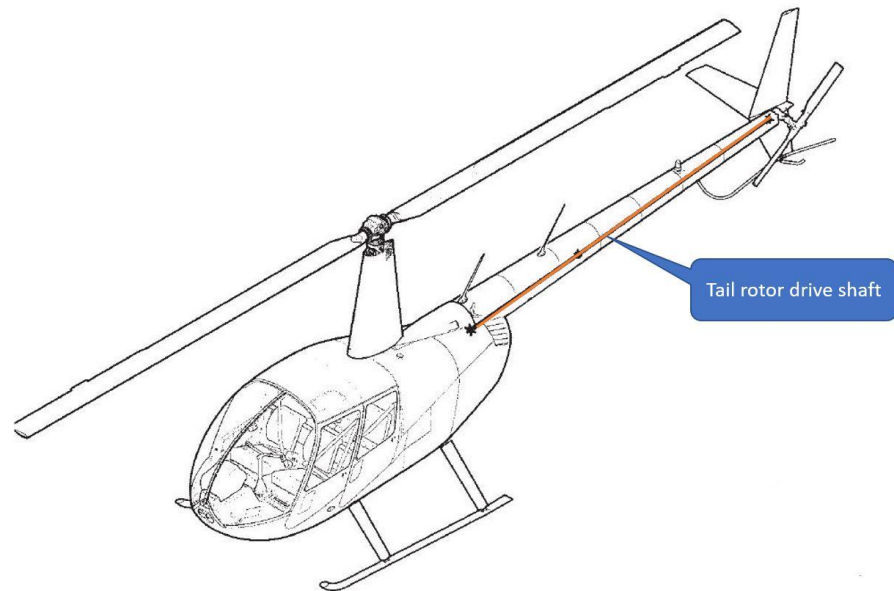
Tail rotor drive shaft. Markings by SHK. Image: Robinson Helicopter Company.
